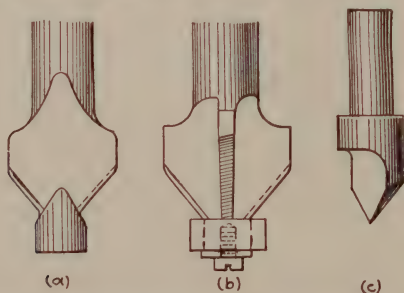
Types of countersinks for flathead screws. The included angle is 82 deg., not 60 deg. as in a center reamer.
